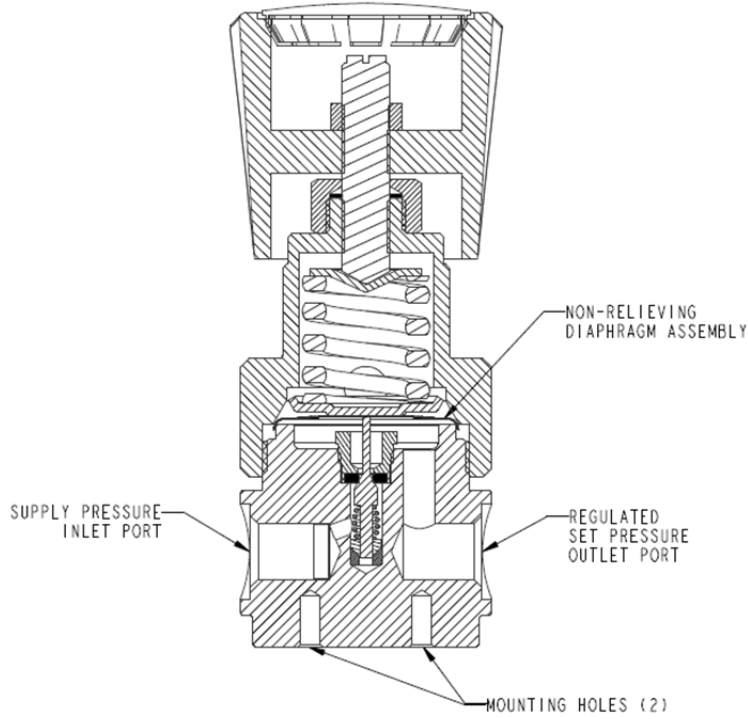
HP500 REGULATOR SECTIONED VIEW
